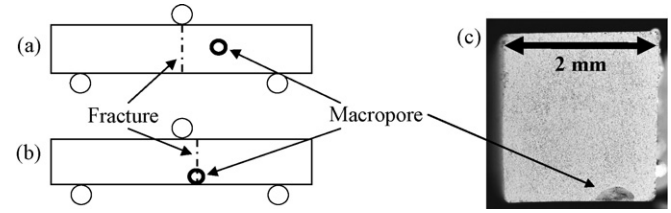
(a and b) Setup of three-point bending tests and (c) fractograph of a specimen.
